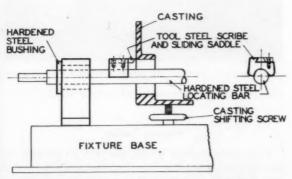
Locating bar and bore scribing gage for checking fixture.
